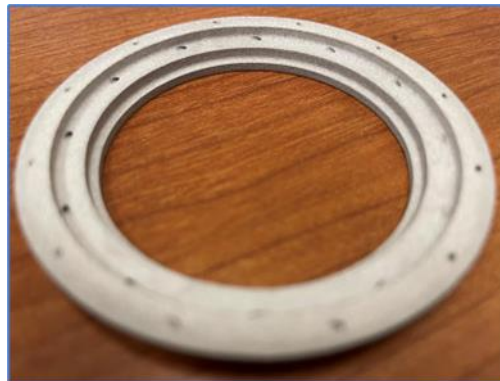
Main-Shaft Rotor Prior to Machining, As Built (Post-Sinter)
